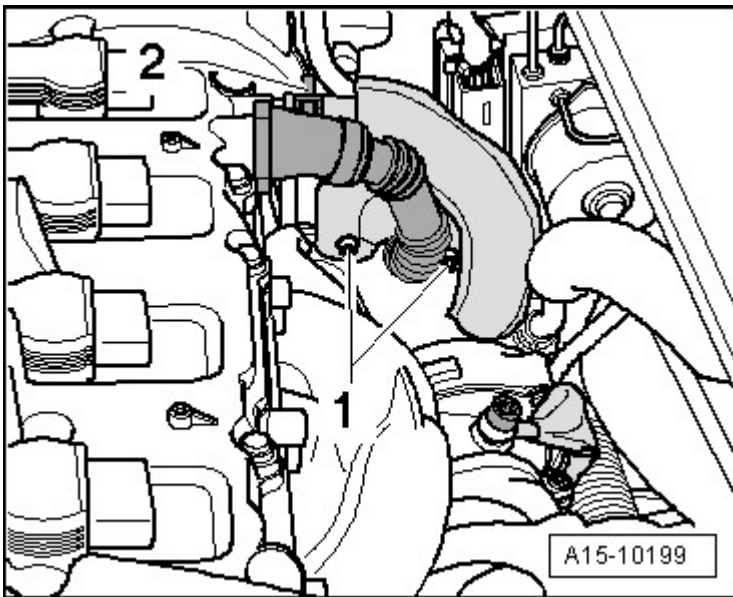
Identifying Line For Crankcase Ventilation With Heat Shield From Turbocharger
